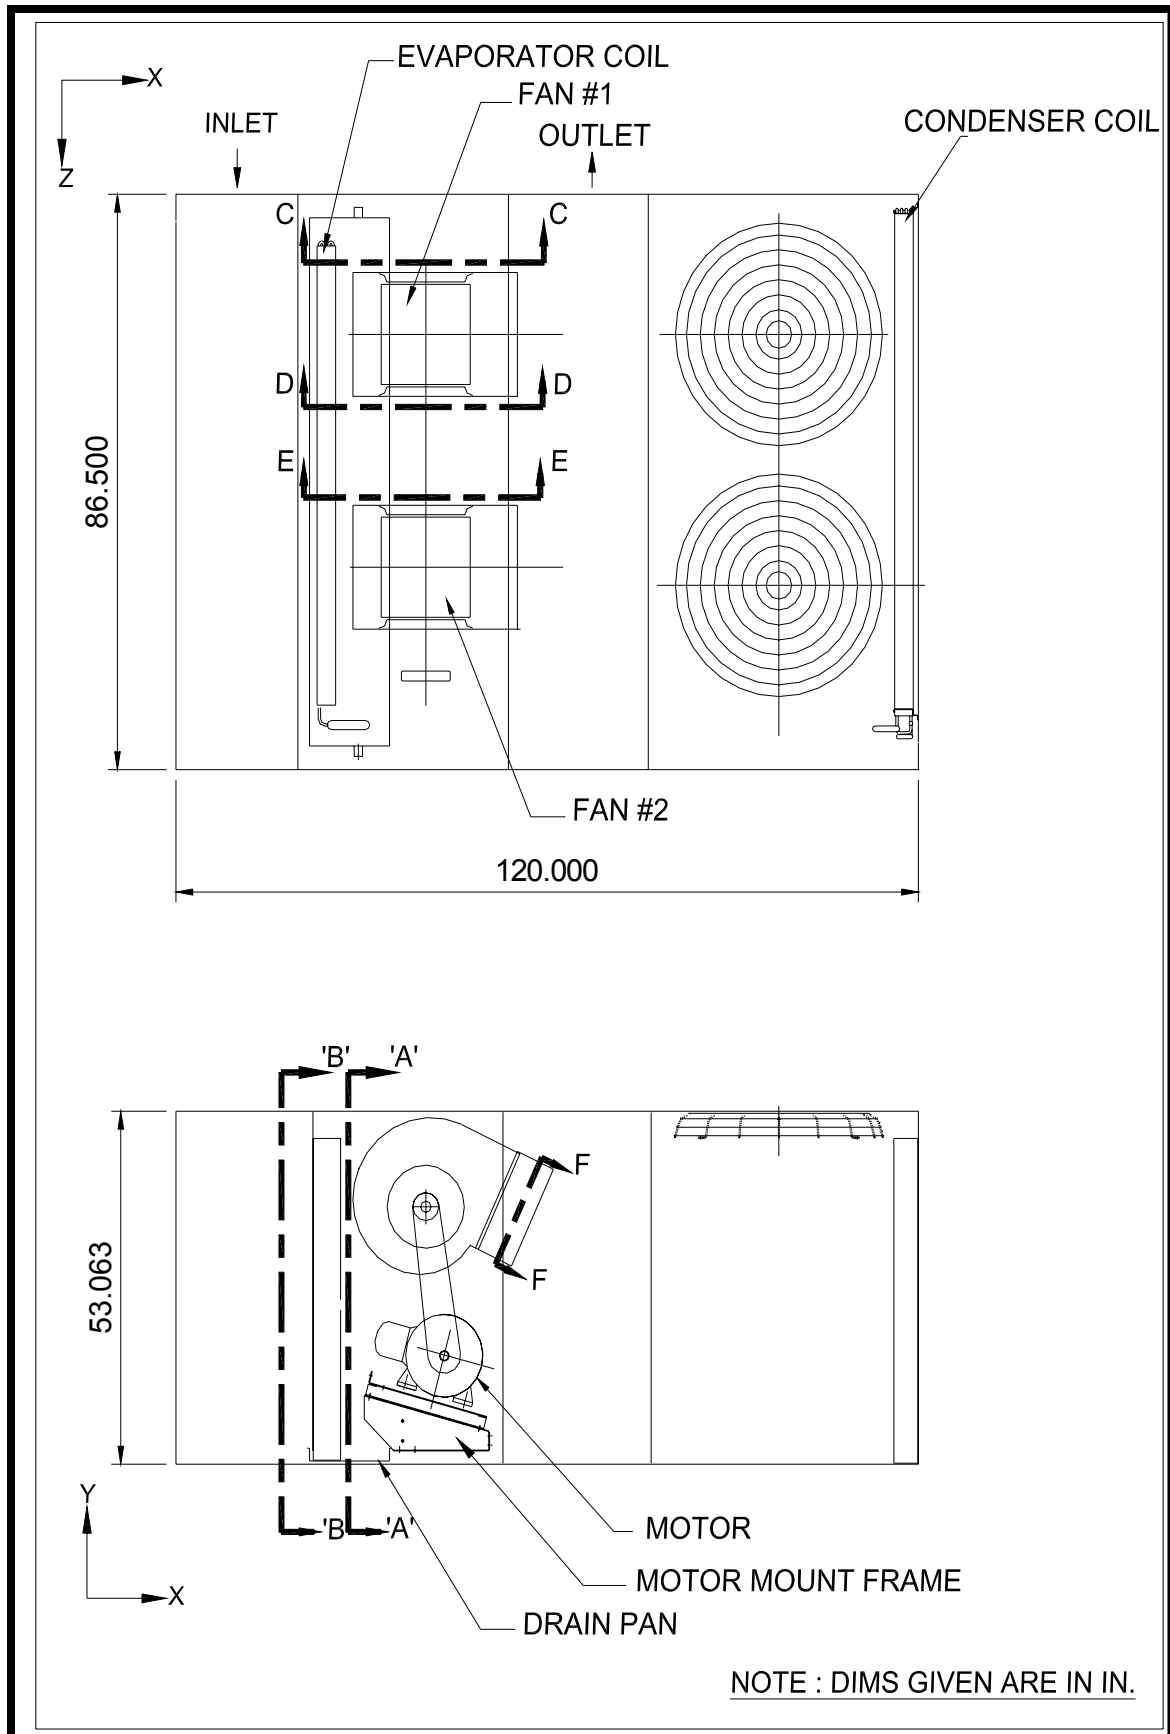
Details drawing of the PU300 unit showing measurement planes.
